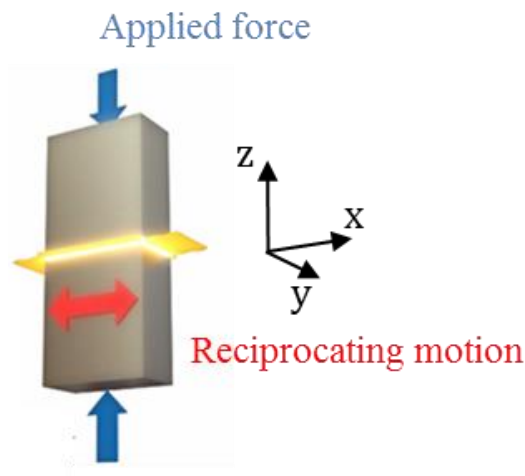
Schematic representation of the linear friction welding procedure on a couple of parallelepipedic workpiece assembled in a butt-configuration on a vertical mounting, source: <https://www.acb-ps.com/>.
